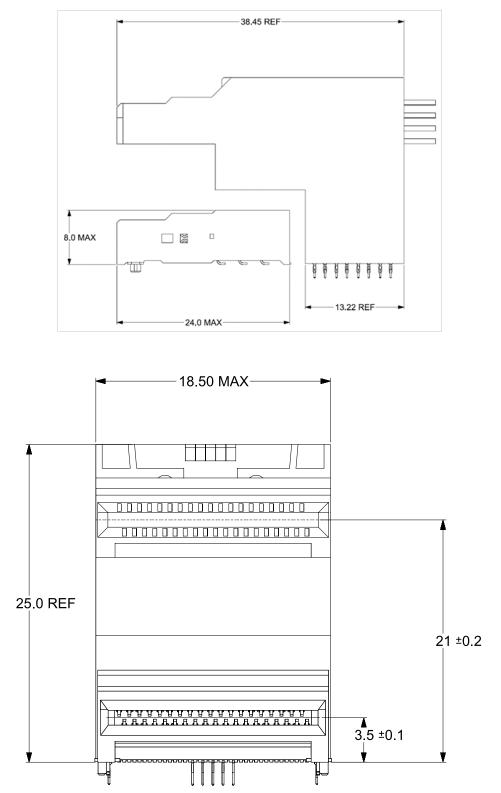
2x1 Cabled over SMT connector and cage – Side View
